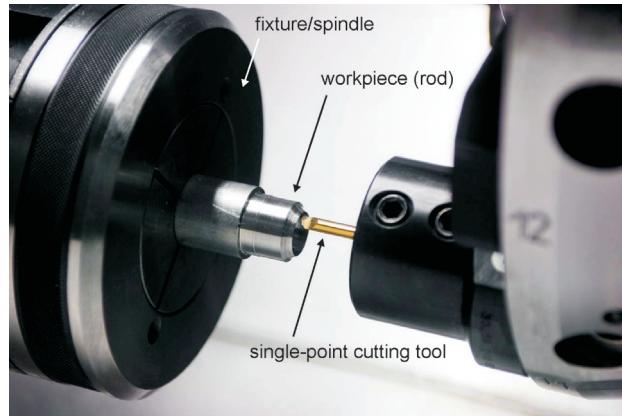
View of the inside of the turning machine showing the rotating workpiece fed into a single-point cutting tool [120].
